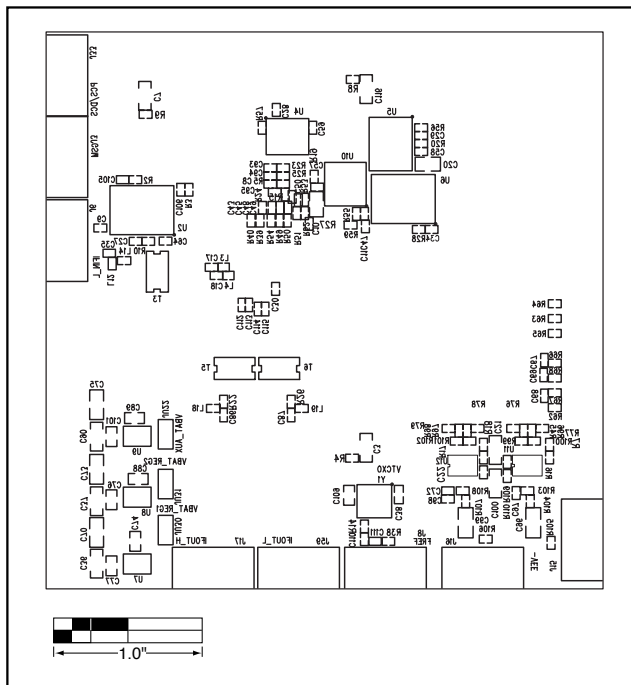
MAX256\_/MAX257\_ EV Kit Component Placement Guide—Solder Side
